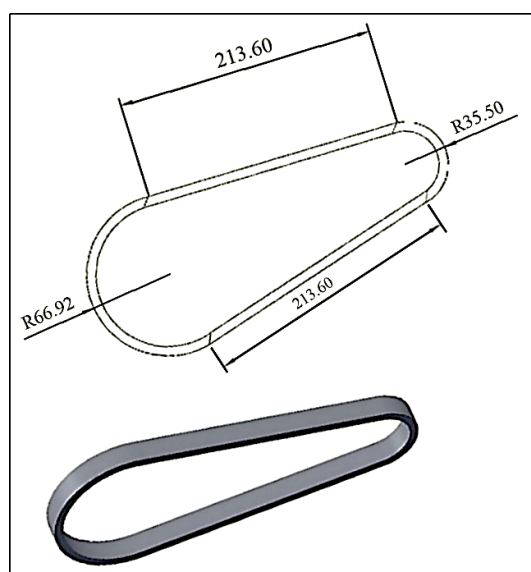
Design & dimensions of flat pulley belt, (unit: mm)
